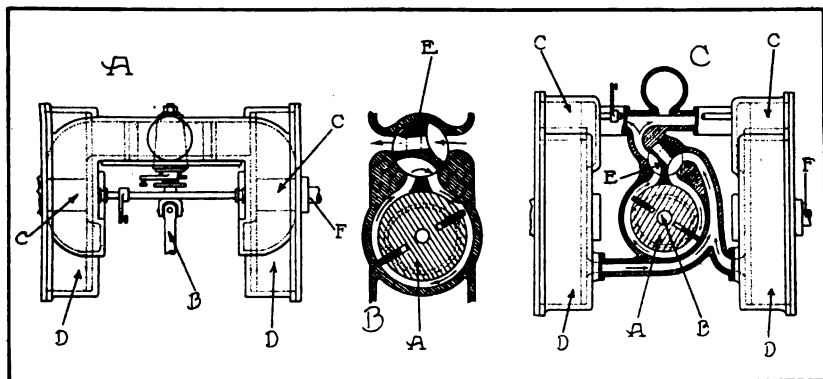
Schlesari Hydraulic Transmission: A, Pump and Casing; B, Control Cock Operated by Driver; C, Direction of Rotation of Pump and Position of Cock During Forward Movement of Vehicle.
